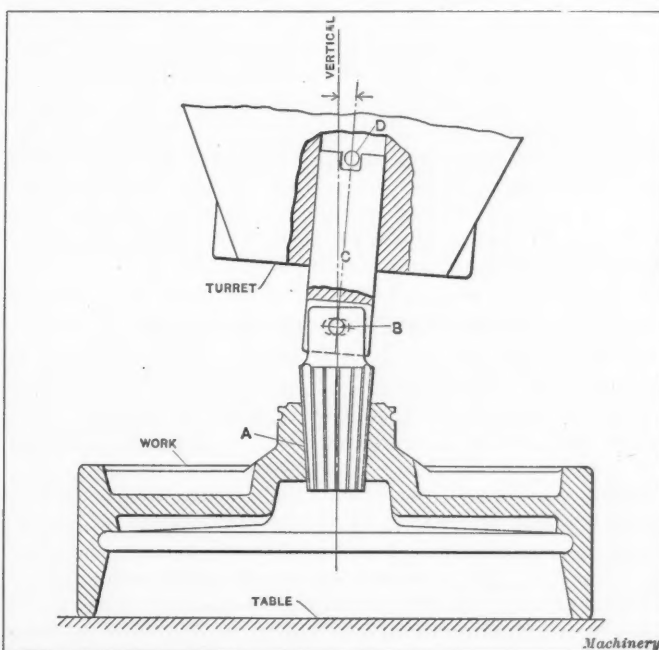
Holder for reaming Taper Holes on Bullard Vertical Turret Lathe
